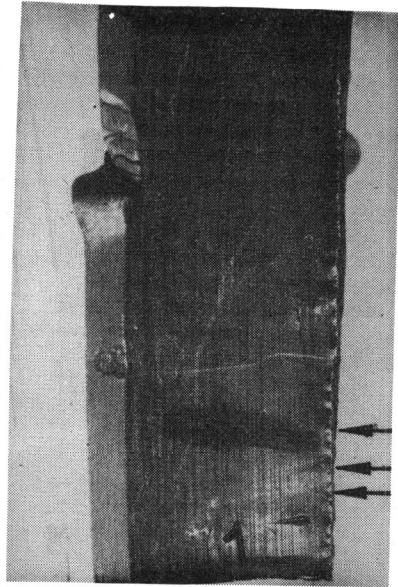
Grinded Fillet Surface (Arrows deformed Crack edge)
